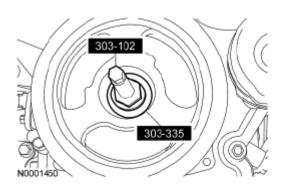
Removing Crankshaft Pulley Courtesy of FORD MOTOR CO.
